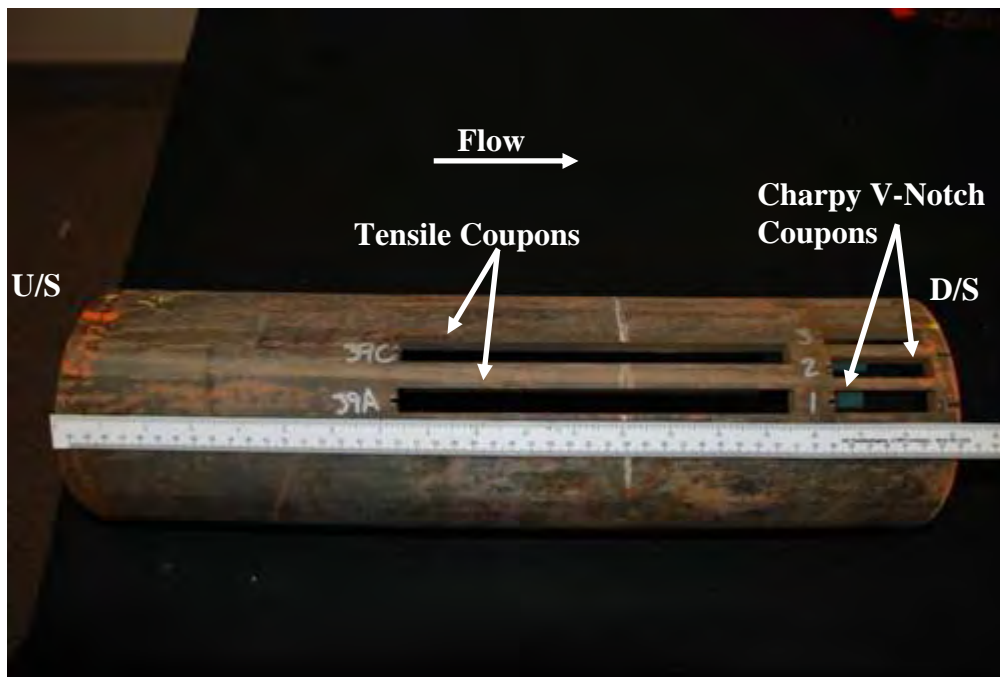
Photograph of 39-Q Showing the Locations for Mechanical Coupon Removal
